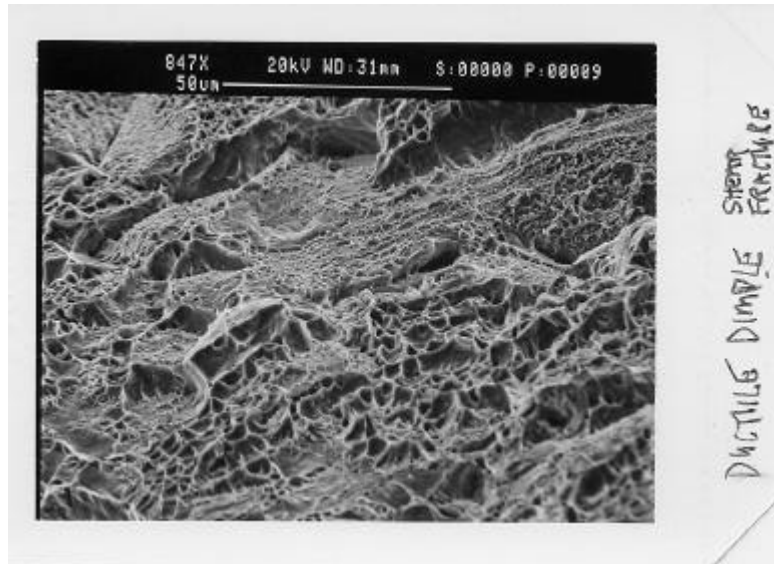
Ductile dimples indicating shear fracture in the middle section of the fracture origin surface
